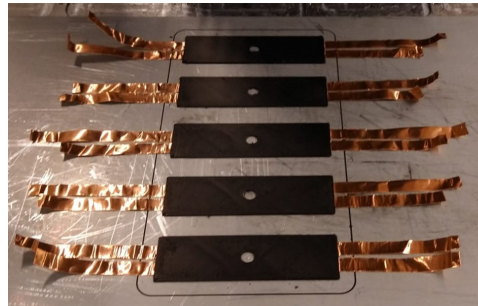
A set of 5 samples after fabrication on the heated printing bed.
